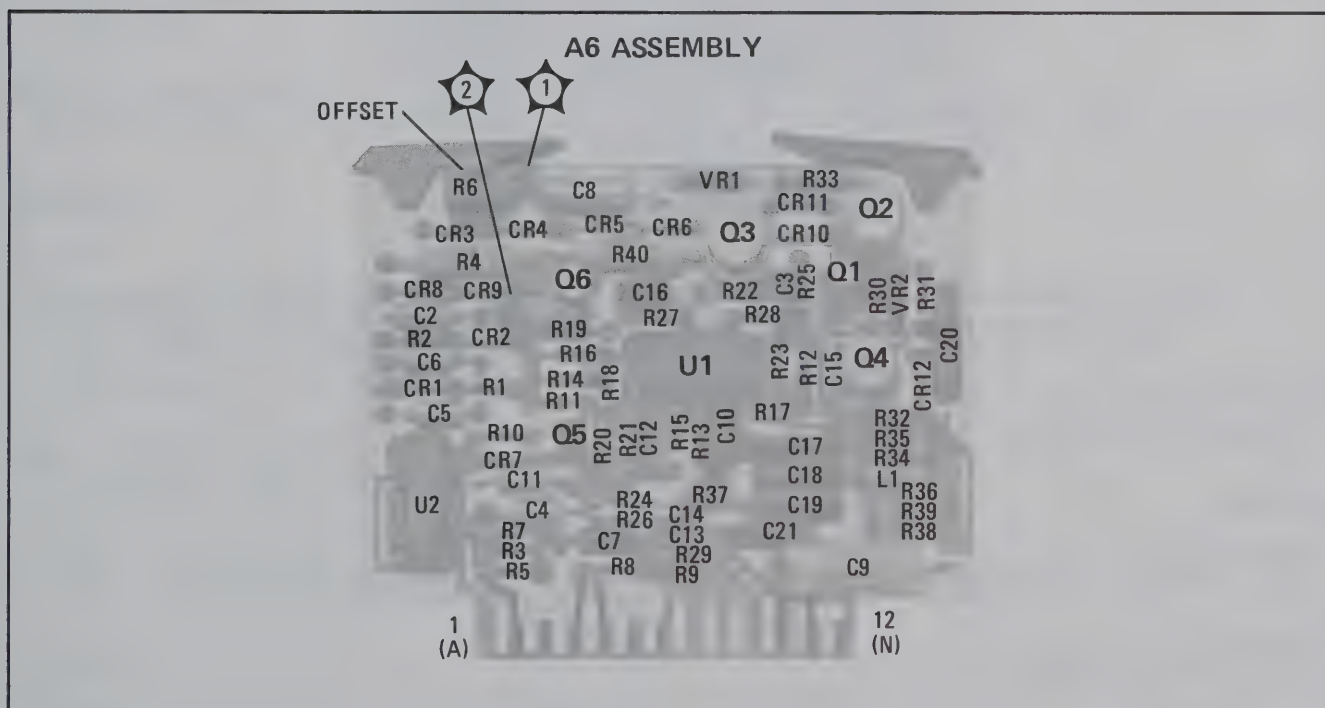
A6 FM Driver Assembly Component and Test Point Location Backdating (Part of Change E)
